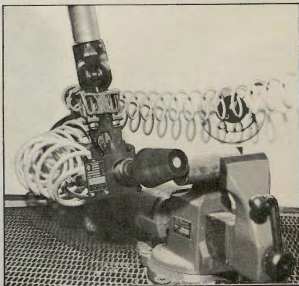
REMOTELY OPERATED DEBURRING TOOL
